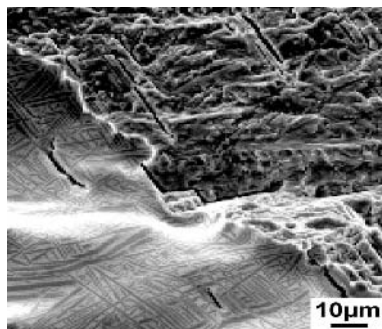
Plateau etched fatigue fracture surface showing the relation between secondary cracks and α plates, SEM
